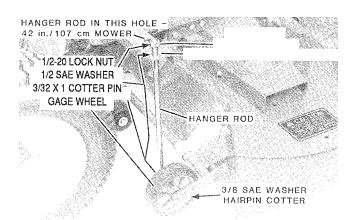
Install Hangar Rods (48 in. Mower Shown)
